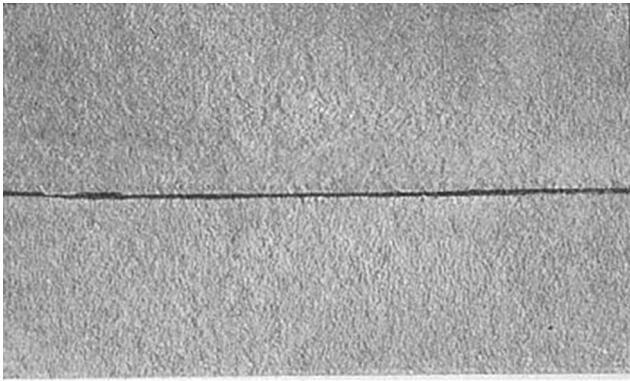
Here is the back of the same weld demonstrating the absolute lack of penetration—weld of no mechanical value and break initiation along its entire length
